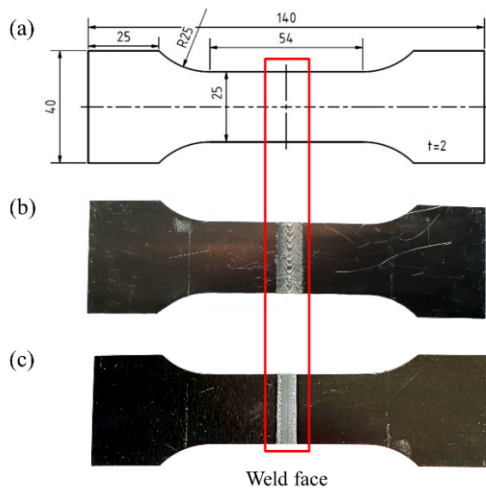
(a) Specimen geometry and position of weld seam in specimens made by (b) conventional and (c) stationary shoulder tools
